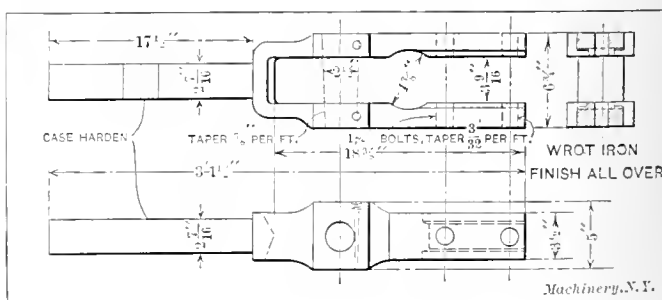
Radius Rod Extension for Valve Gear shown in Fig. 1
